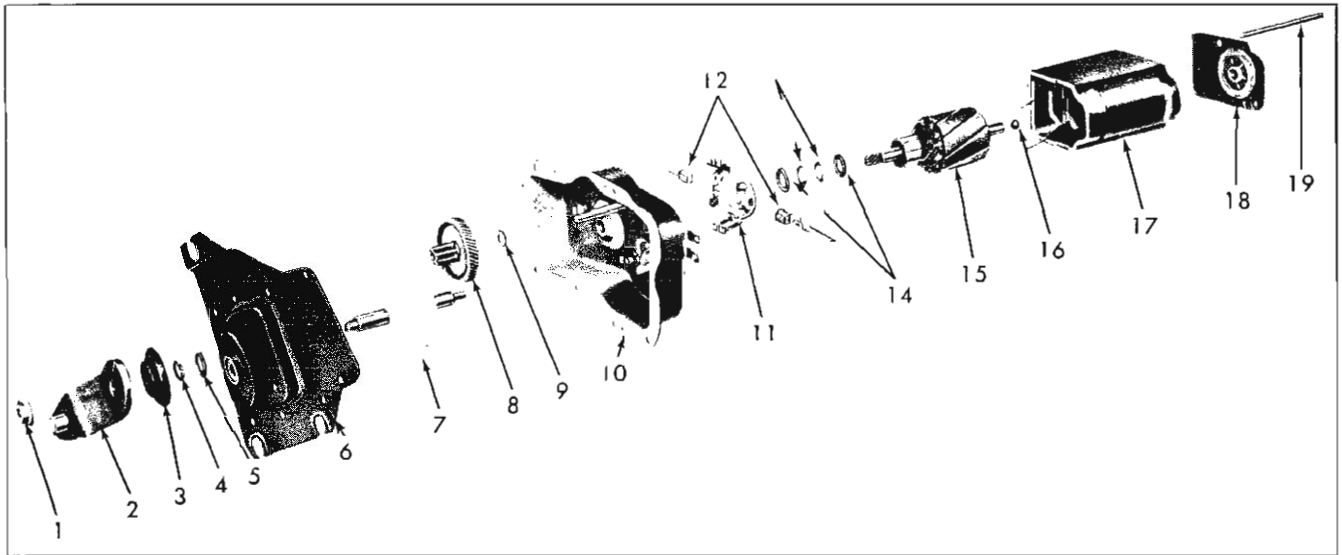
Wiper Motor and Gear Box Exploded View—Assembly
